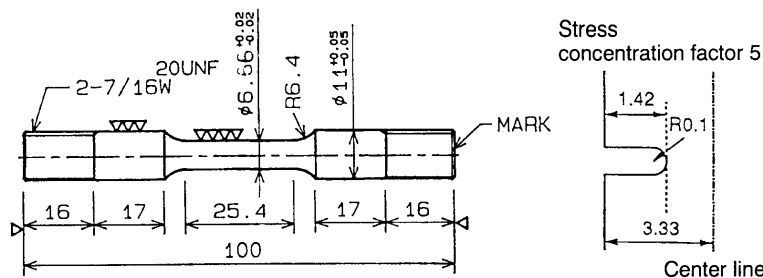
Notched specimen for cathodic charging delayed fracture tests.
